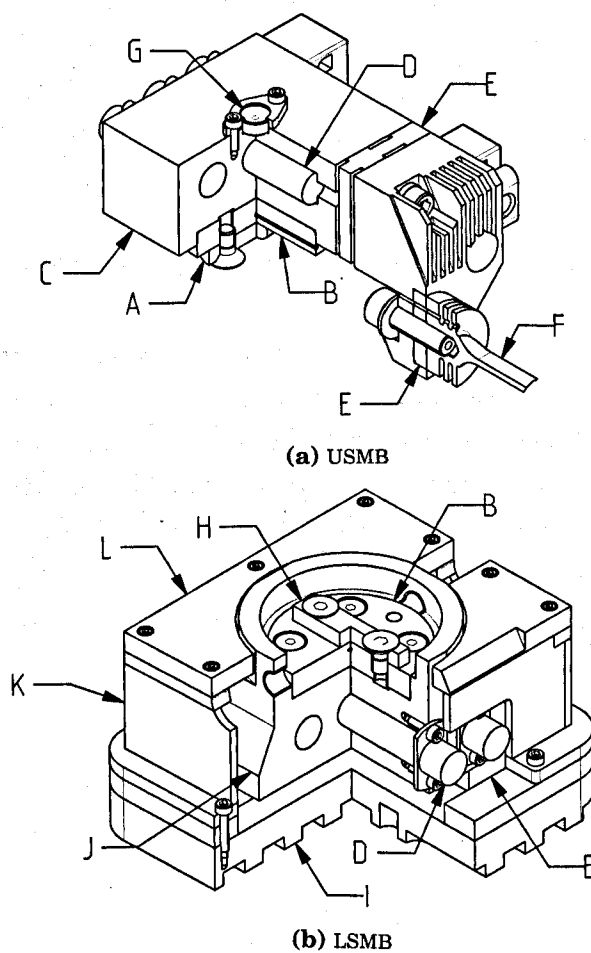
Cut away views of the specimen mounting blocks, labelled components are: (A) cylindrical specimen, (B) SMP, (C) USMB, (D) cartridge heater, (E) thermal bulkhead, (F) drive linkage, (G) load-bar locating socket, (H) flat specimen, (I) base plate, (J) LSMB (K) thermal box, (L) thermal lid.
